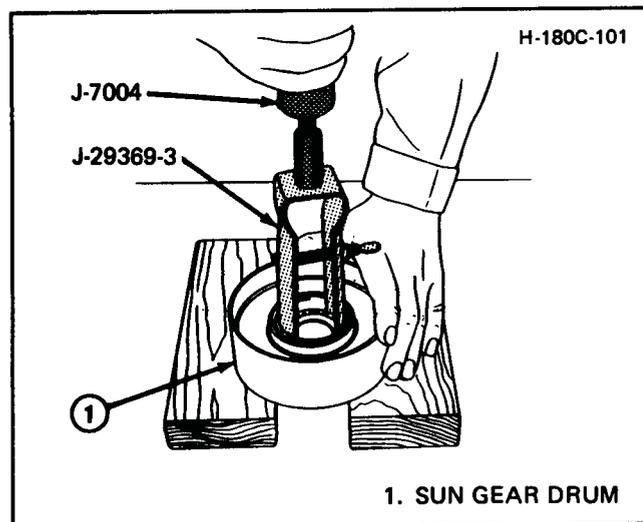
C-101 Removing Reaction Sun Gear Drum Bushing
